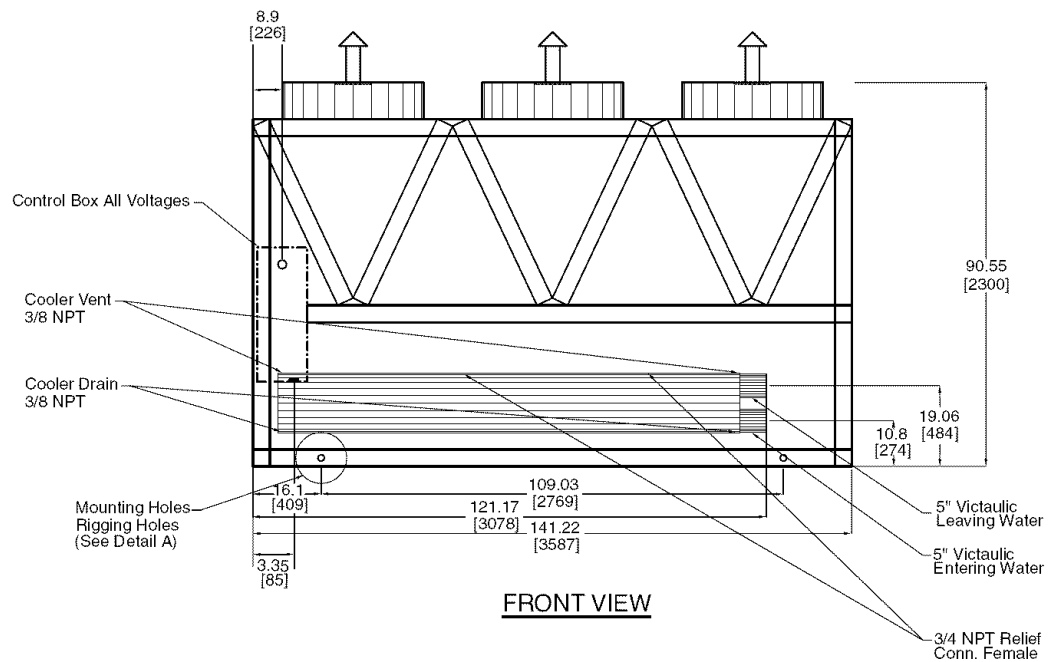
30XA080 Air-Cooled Liquid Chiller Dimensions
